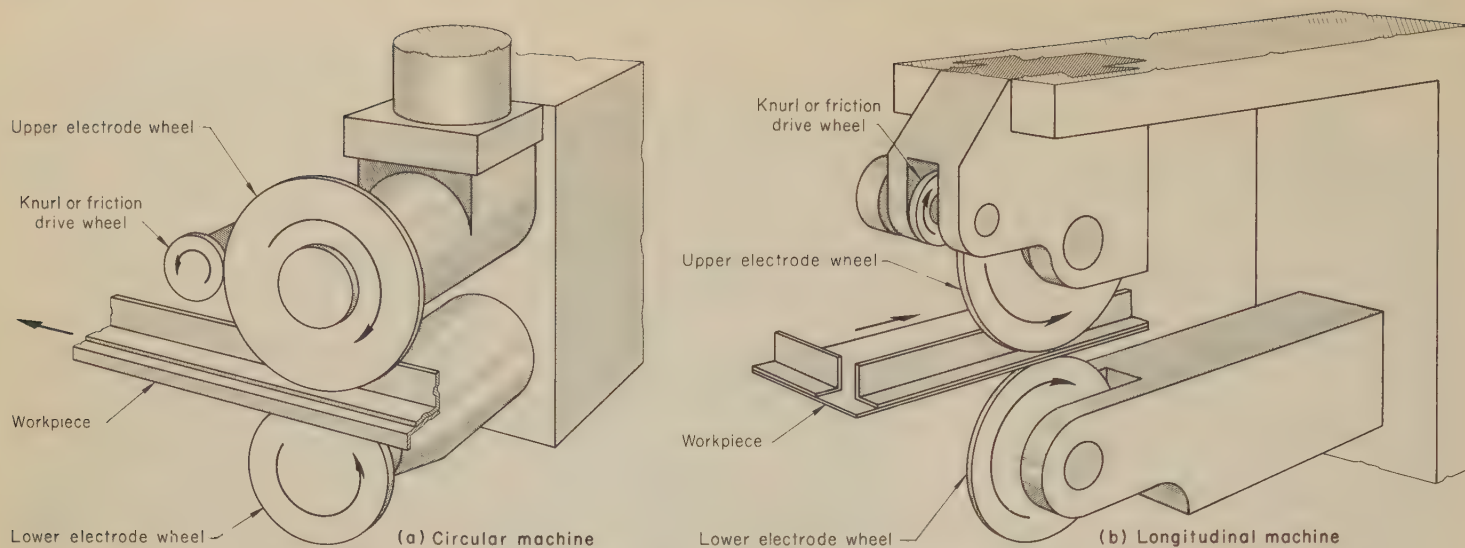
Position of electrode wheels on circular and longitudinal resistance seam welding machines
